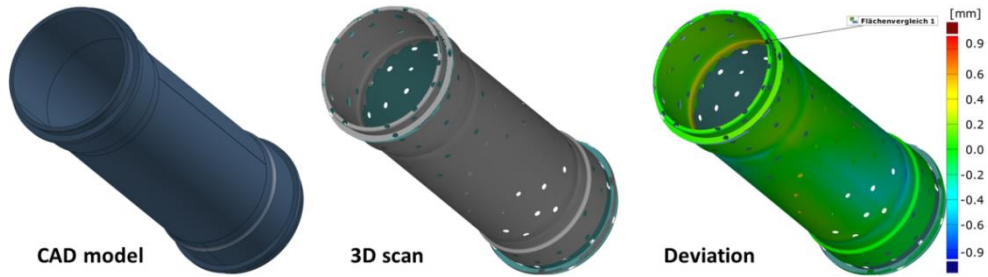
Example of a TIG welded titanium alloy component for aerospace industry from PFW Aerospace GmbH. The wall thickness of the pipe component with a diameter of 50.8 mm is only 0.4 mm. The surface is covered with marker points necessary for the 3D scan.
